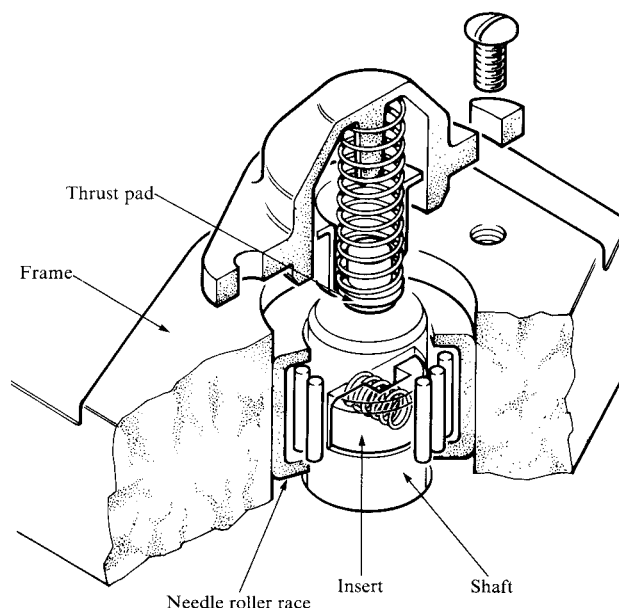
Pivot bearing, showing the needle roller bearings preloaded by a sprung insert incorporated in the shaft.
